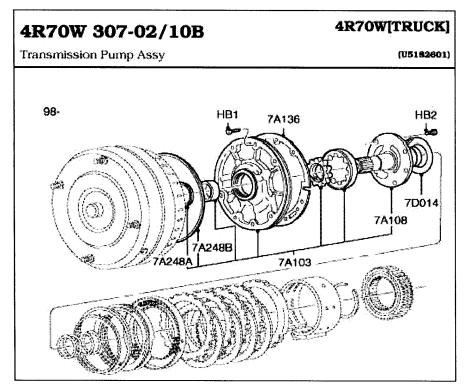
The parts counter employees make extensive use of the CD that contain exploded illustrations of vehicle parts and assemblies.
